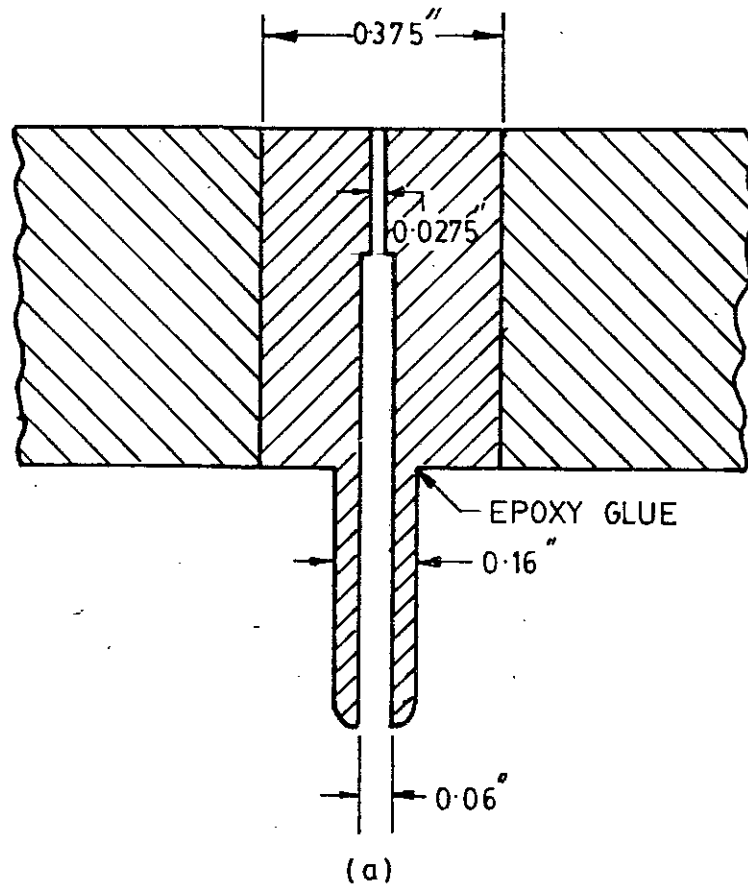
SECTIONAL VIEW OF STATIC PRESSURE HOLE
